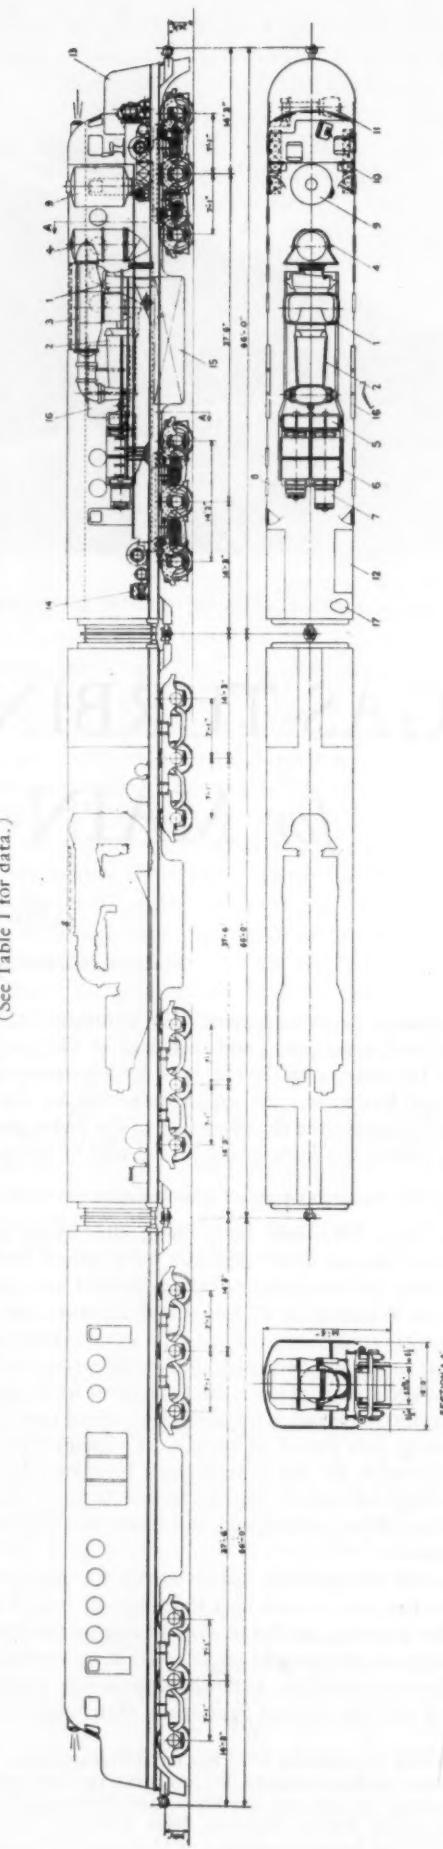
7500-HP PASSENGER AND FREIGHT GAS-TURBINE LOCOMOTIVE
